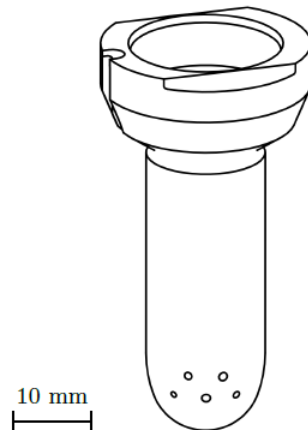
Illustration of a standard nozzle tip for large two-stroke marine Diesel engine fuel injectors indicating the typically five-hole design of the nozzle bores. [Courtesy of WinGD]
